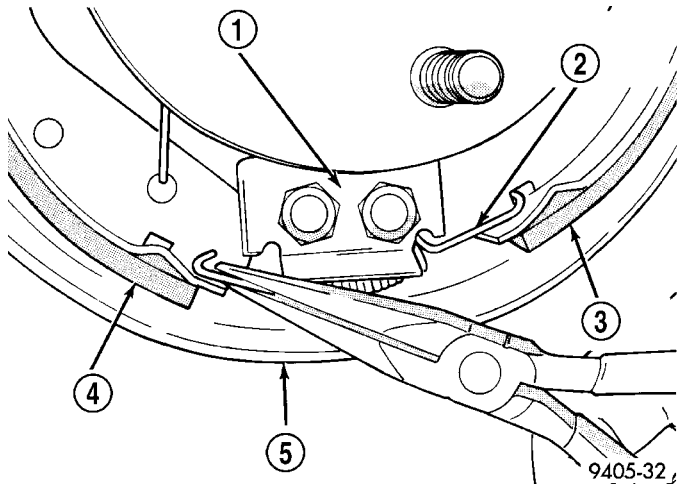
Brake Shoe To Anchor Plate Return Spring
